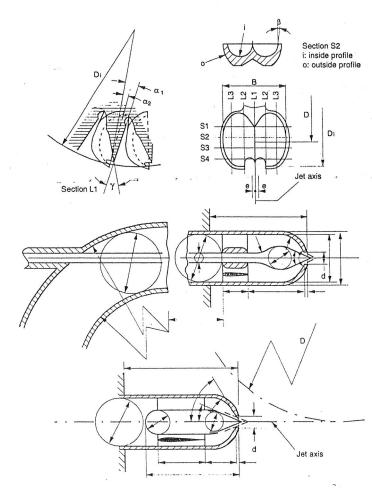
Pelton turbine: Example of dimensions to be checked on the buckets and nozzles
